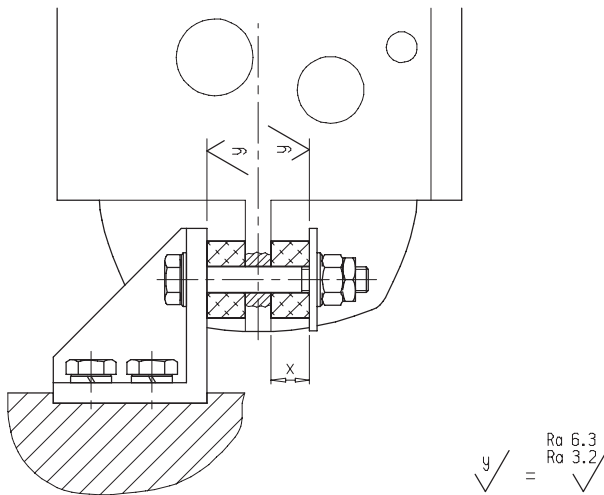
Torque arm on parallel shaft helical gear unit
